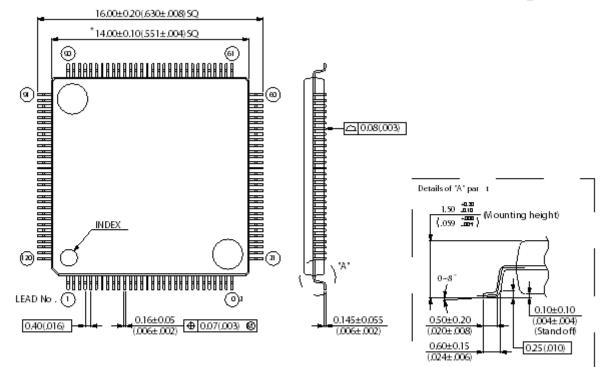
120-lead LQFP Package Mechanical Drawing
